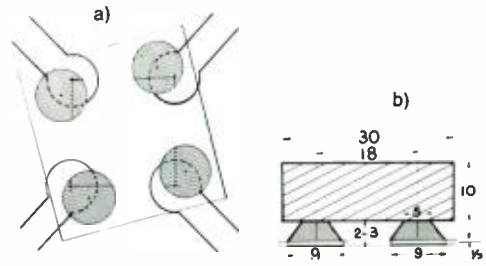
a) Chip placement (view through chip); b) chip and circuit after reflow.
